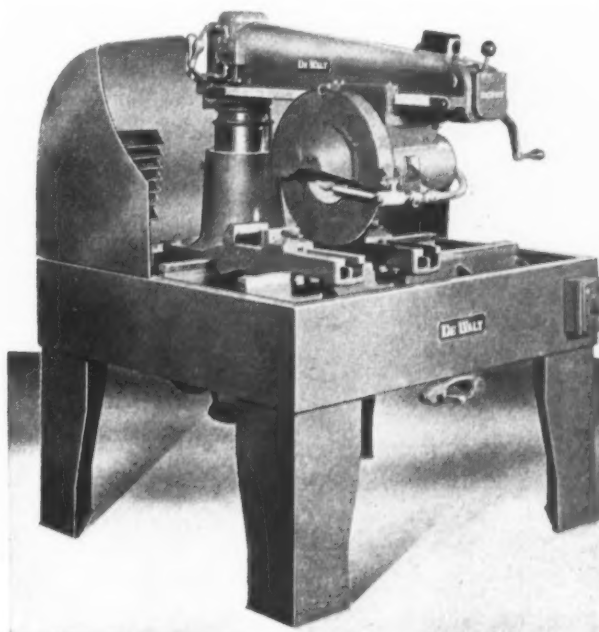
DeWalt Heavy-duty Metal-cutting Machine
